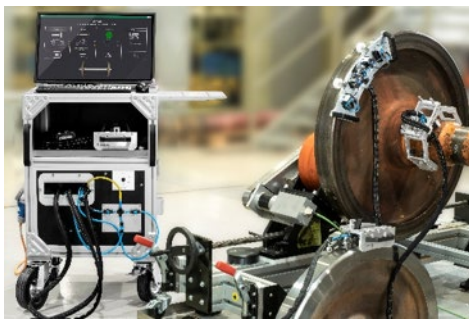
PASAWIS – A wheelset inspection system that can be used mobile in production
